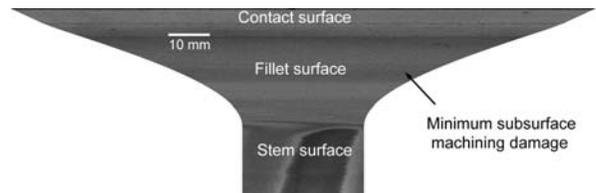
Laser-scatter scan image of SN235P valve 8 after finish machining.
